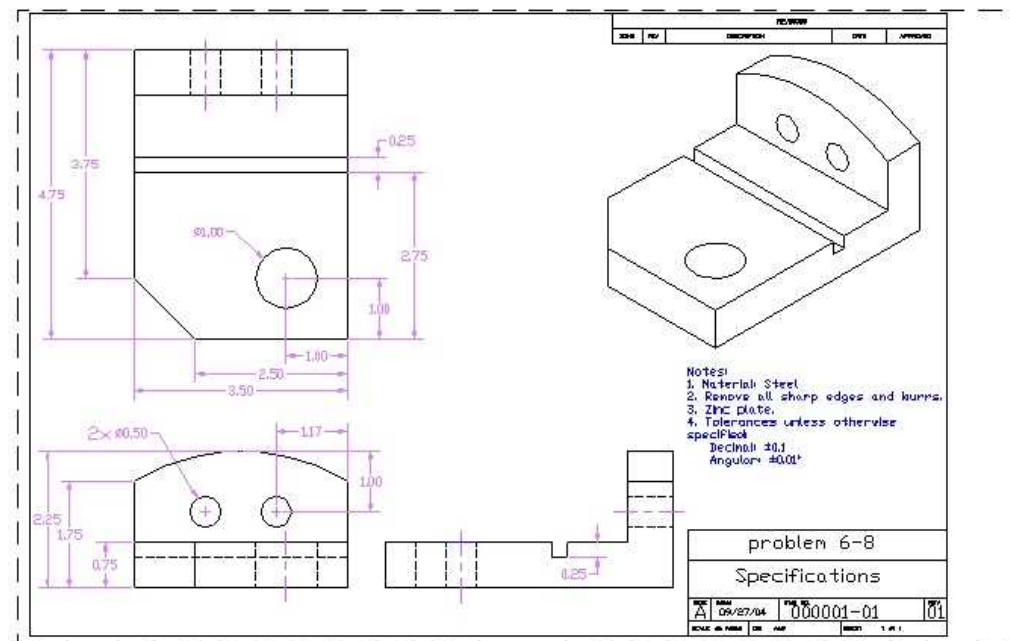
A Sample Orthographic Drawing made from a 3D Part
